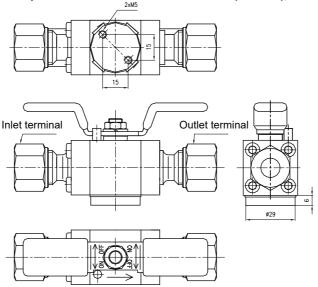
Ball valve - example of special modification - threads for holder (971 .. D1), dimensional drawing
